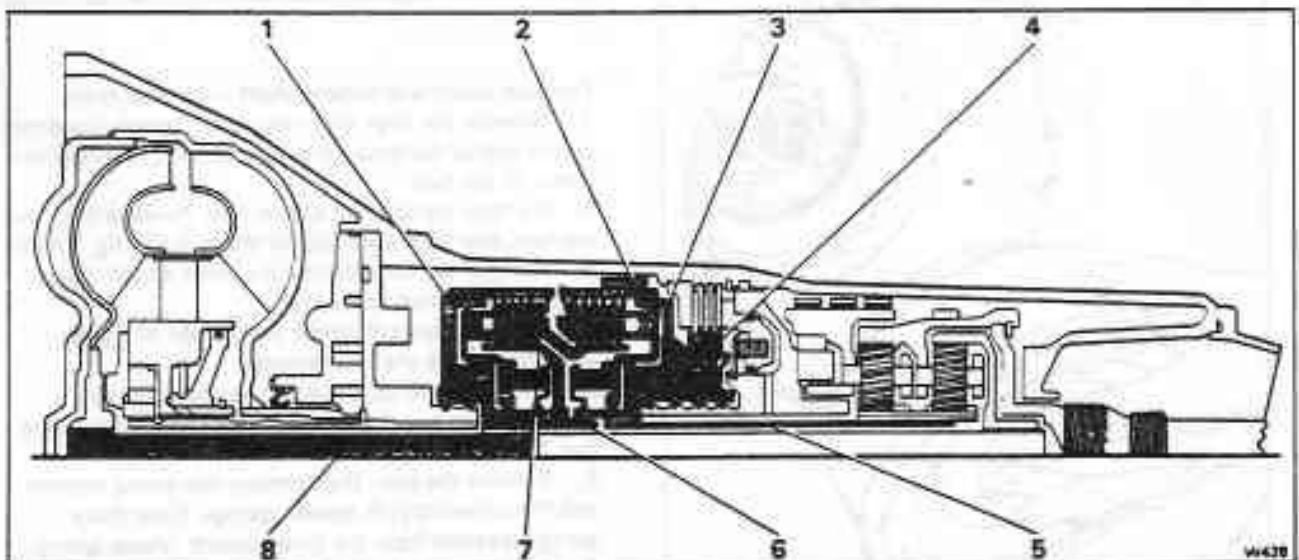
Sectioned view of transmission showing forward and direct clutches
